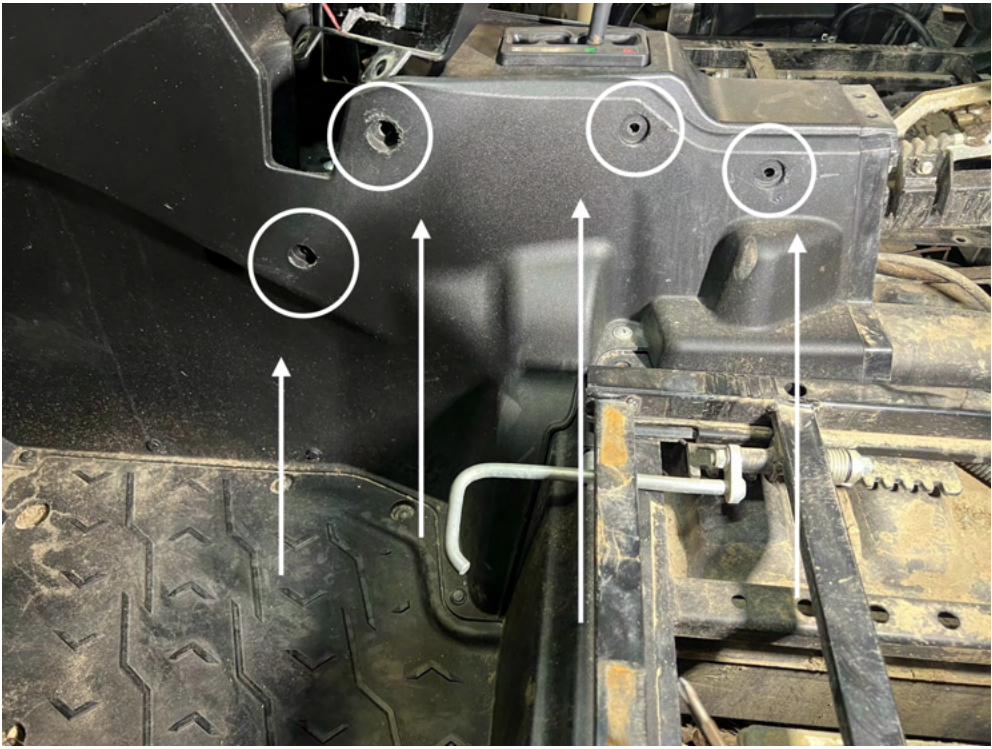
1: This will allow some space to feed rear harness through to rear of machine.
